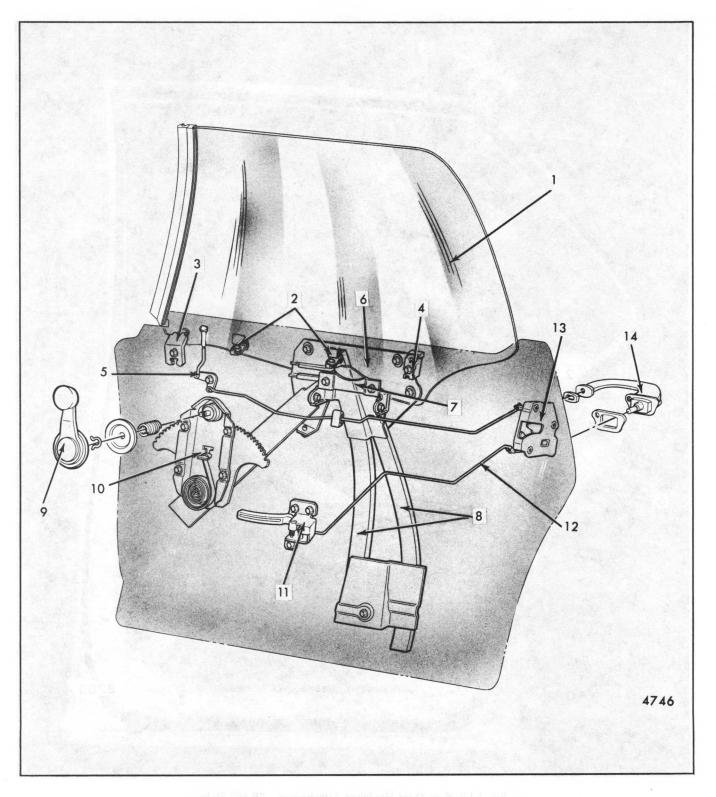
Rear Door Hardware - "B and C-39 and 49" Styles
